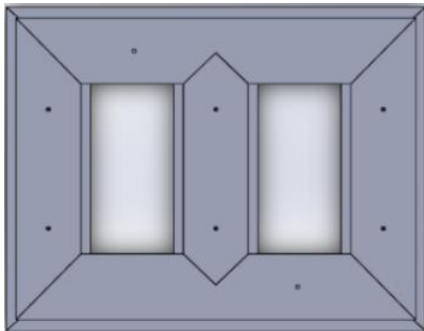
Surface view of 3-phase Transformer with solid stacks
